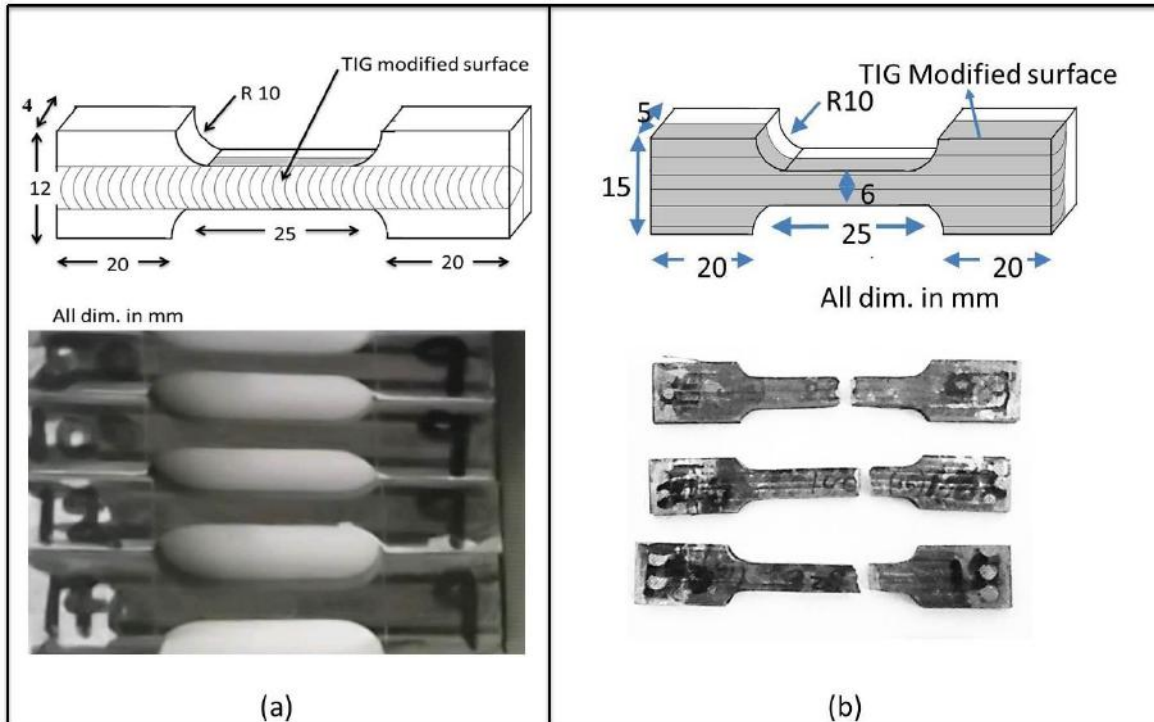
Schematic view and typical appearance of tensile test sample for a) Single-pass surface modification b) multi-pass surface modification.
